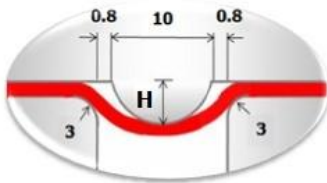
Layout of drawbeads in liftgate draw die (H: drawbead height, Rs: radius of shoulder)
